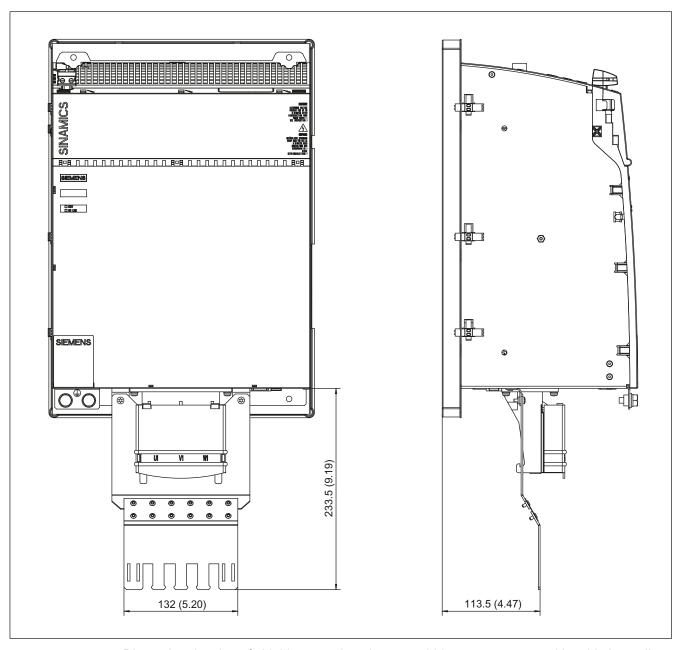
Dimension drawing of shield connecting plate on a 200 mm component with cold plate, all dimensions in mm and (inches)
